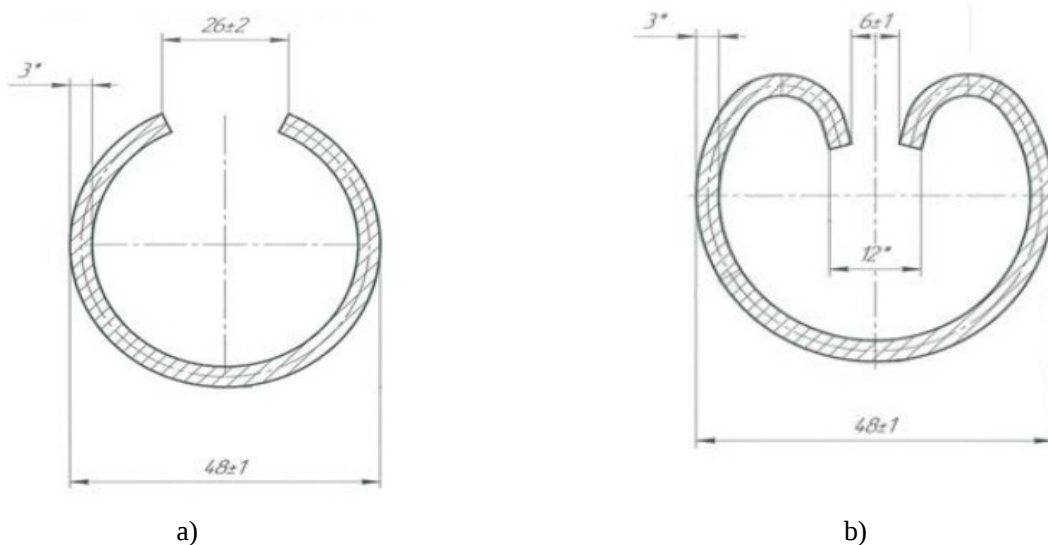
Friction-fastened anchor bolt section: a) ATF-type C-section with 3 mm thick walls; b) ATP-type W-section with 3 mm thick walls
